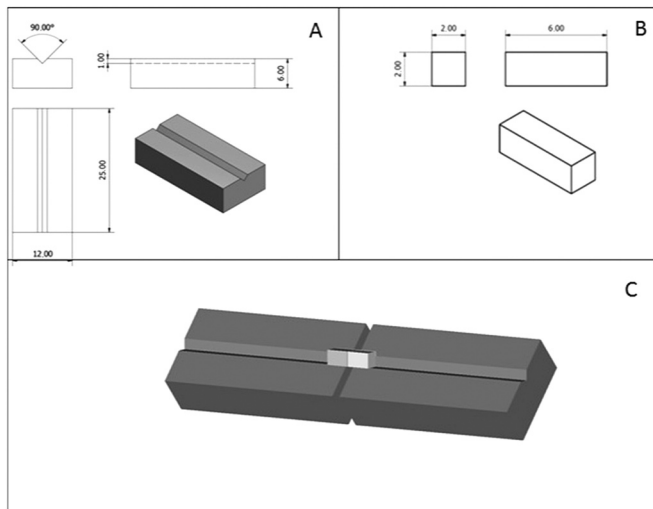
Gerald's holder and stick shape specimen. Technical drawing of the holder (A) and of the specimen (B) and geometry of the set assembled (C).
